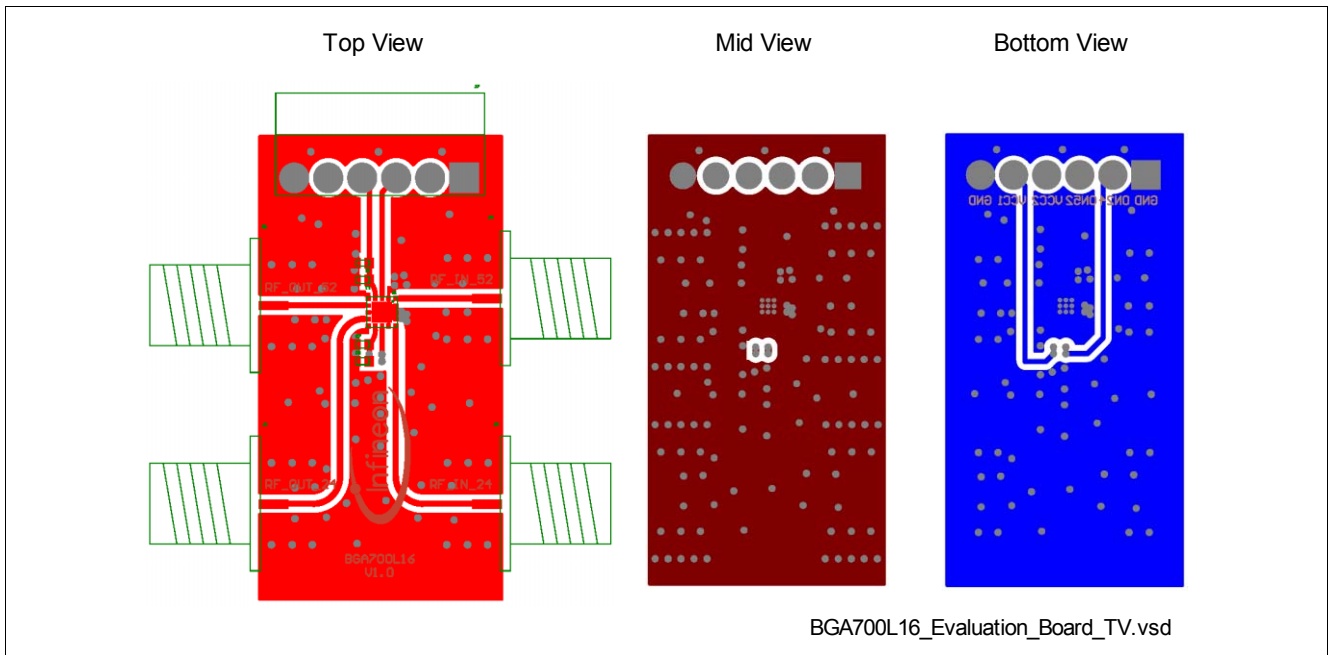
Top View on Evaluation Board (Dimension 37mm x 18.5mm)
